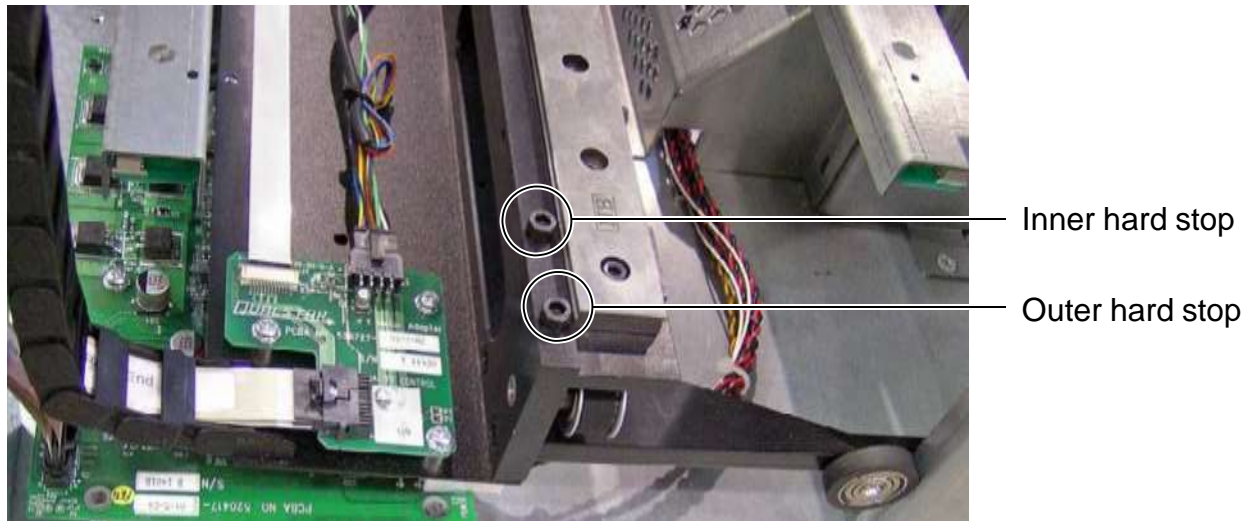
Outer and inner hard stops on the handler’s X-axis (right side shown)
